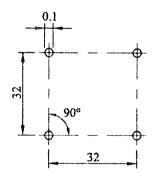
Tolerance diagram for the axis of the pins at maximum material size
